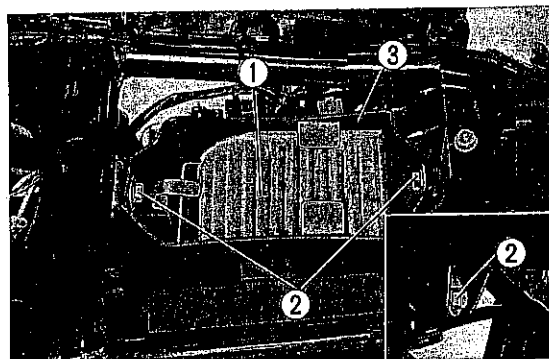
① Air cleaner element ② 6 mm bolts ③ Air cleaner case
